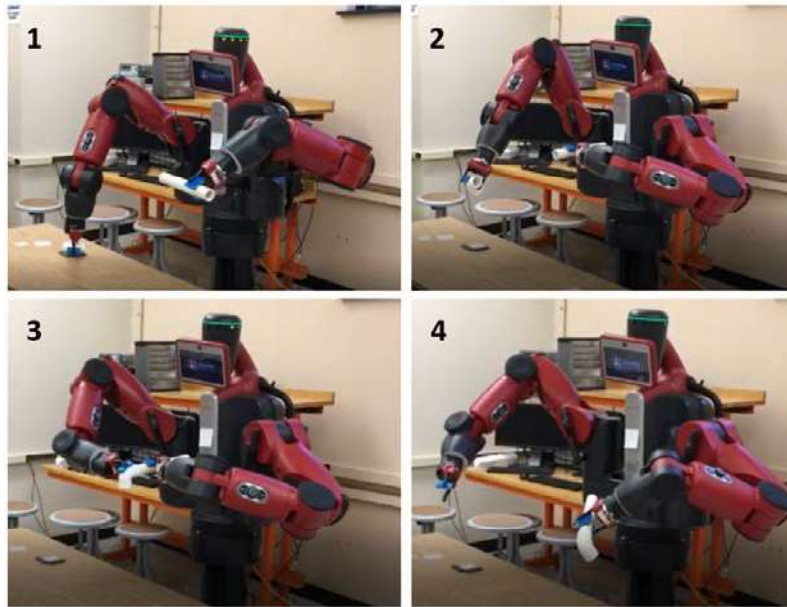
Attaching pipe fittings with Baxter robot; (1) picking one part, (2) picking the second part, (3) attaching the pipe and its fitting, (4) pass the assembly over to the human worker.
